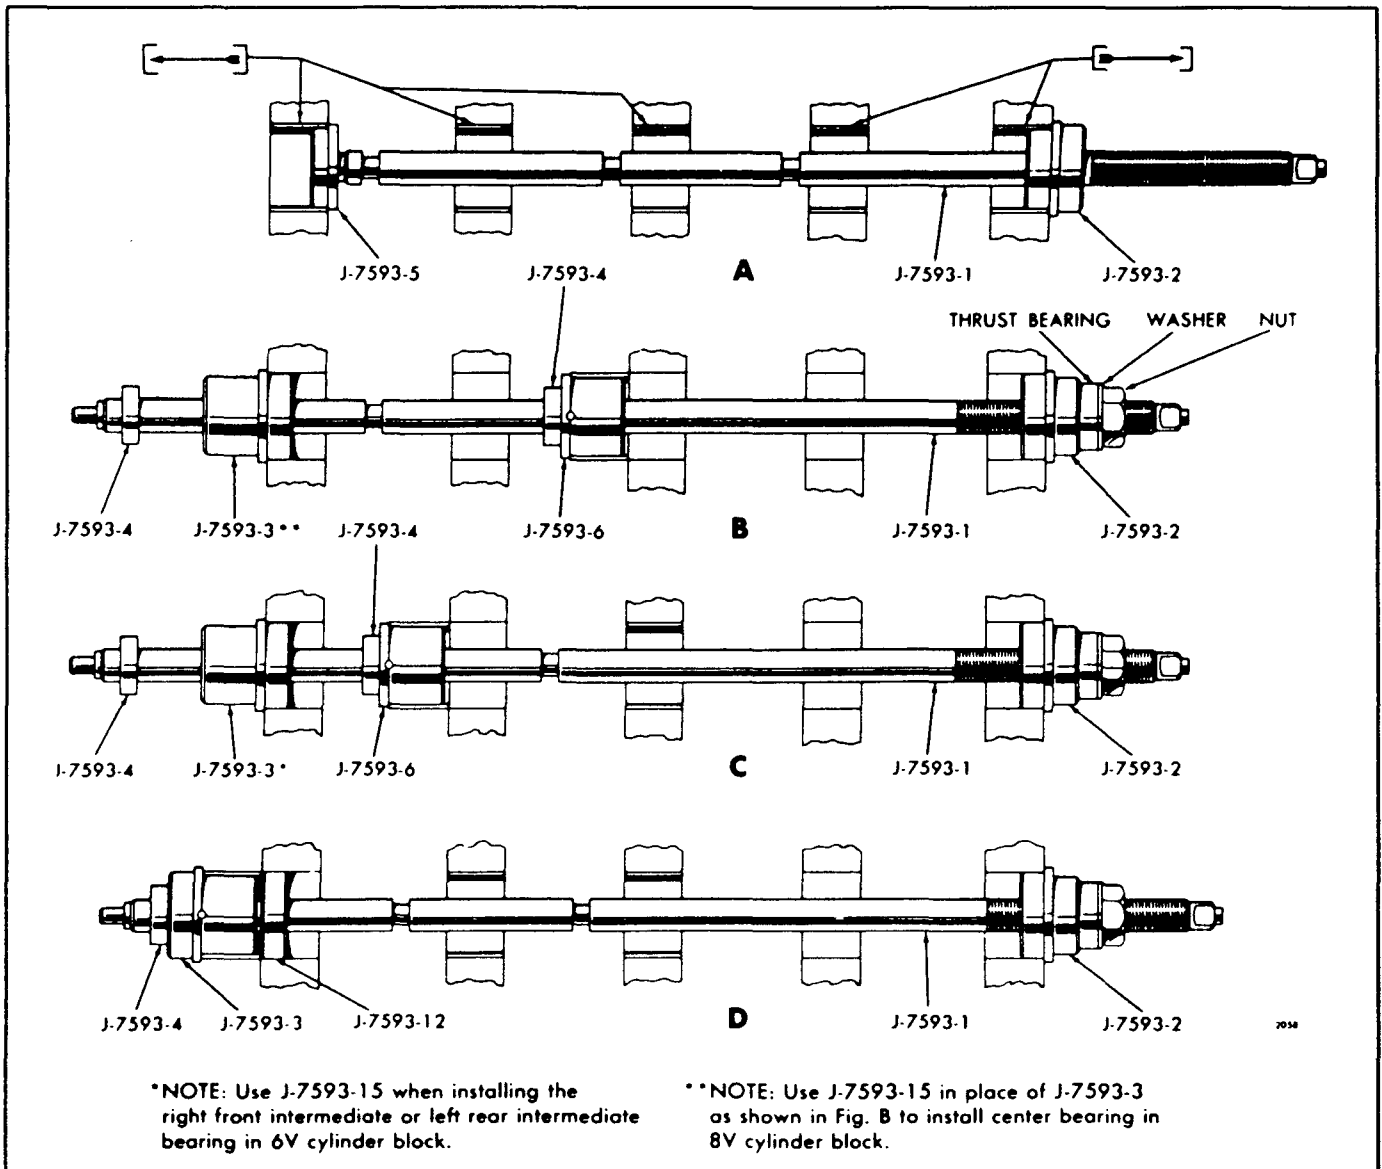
Removing and Replacing Camshaft or Balance Shaft Bearings
